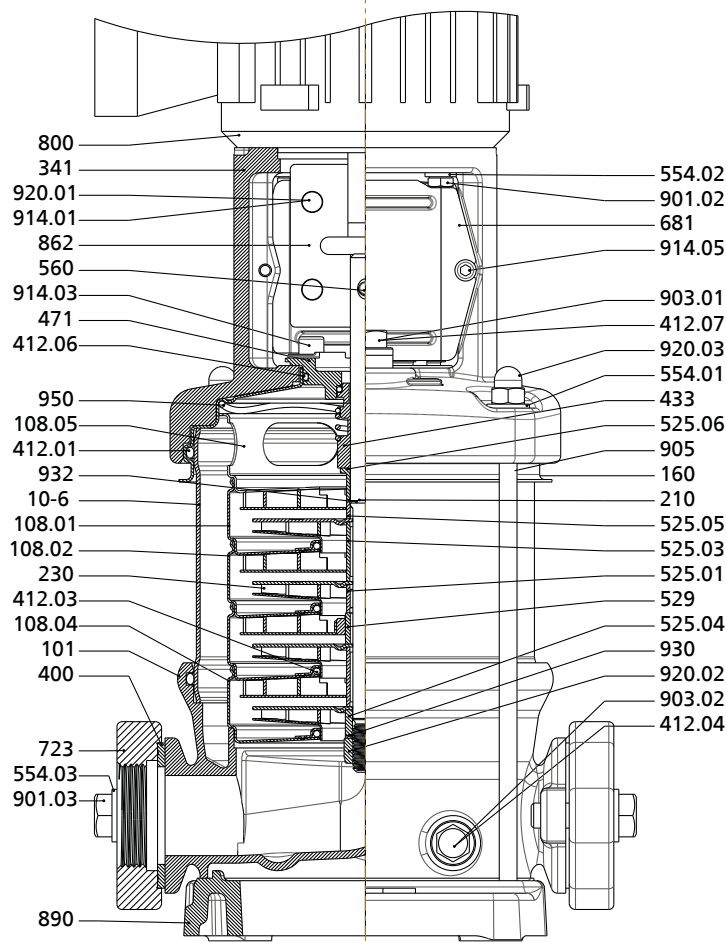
General assembly drawing DPV 2(L)B, 4(L)B, 6(L)B
